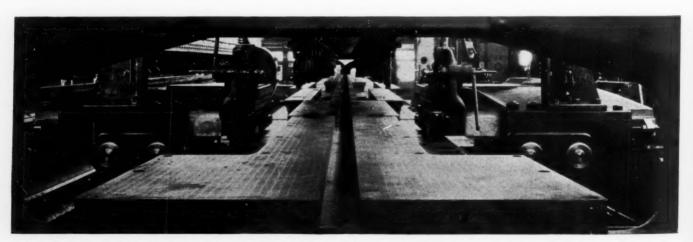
Bed of trimming machine designed for continuous method of operation. Plates are drawn in, trimmed and ejected at the far end of machine for other operations
